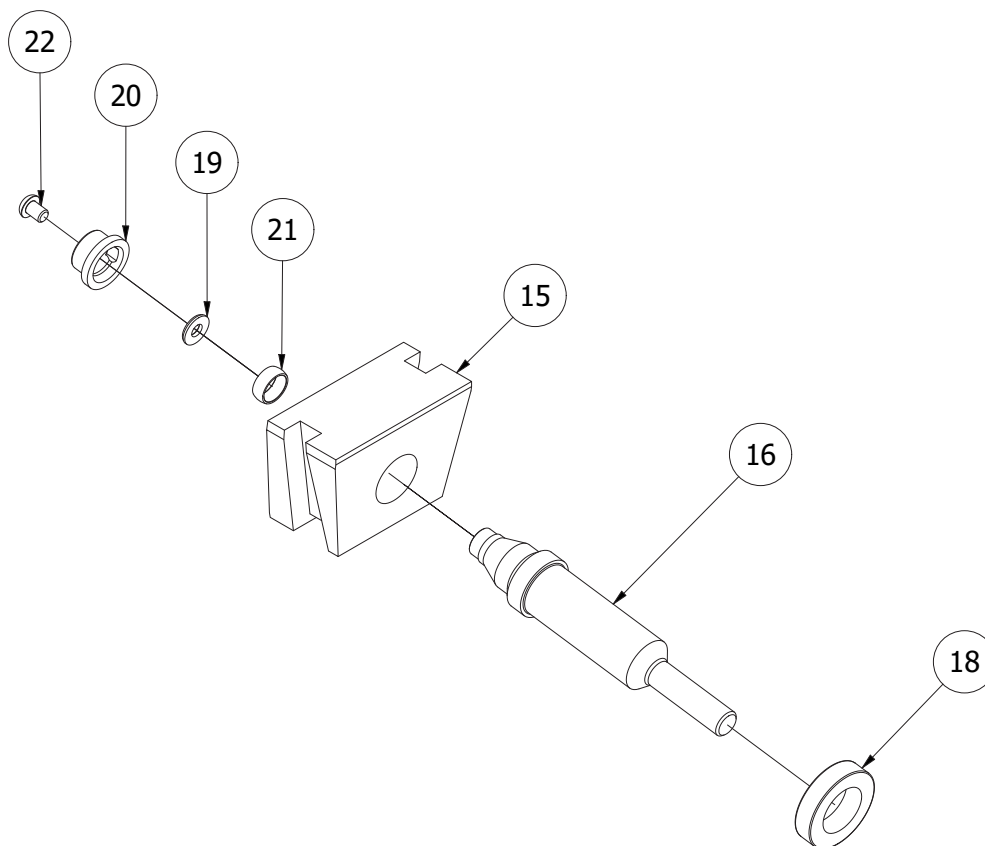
AGSE-E22102-S03 LH Spindle Assembly (Fixed)
